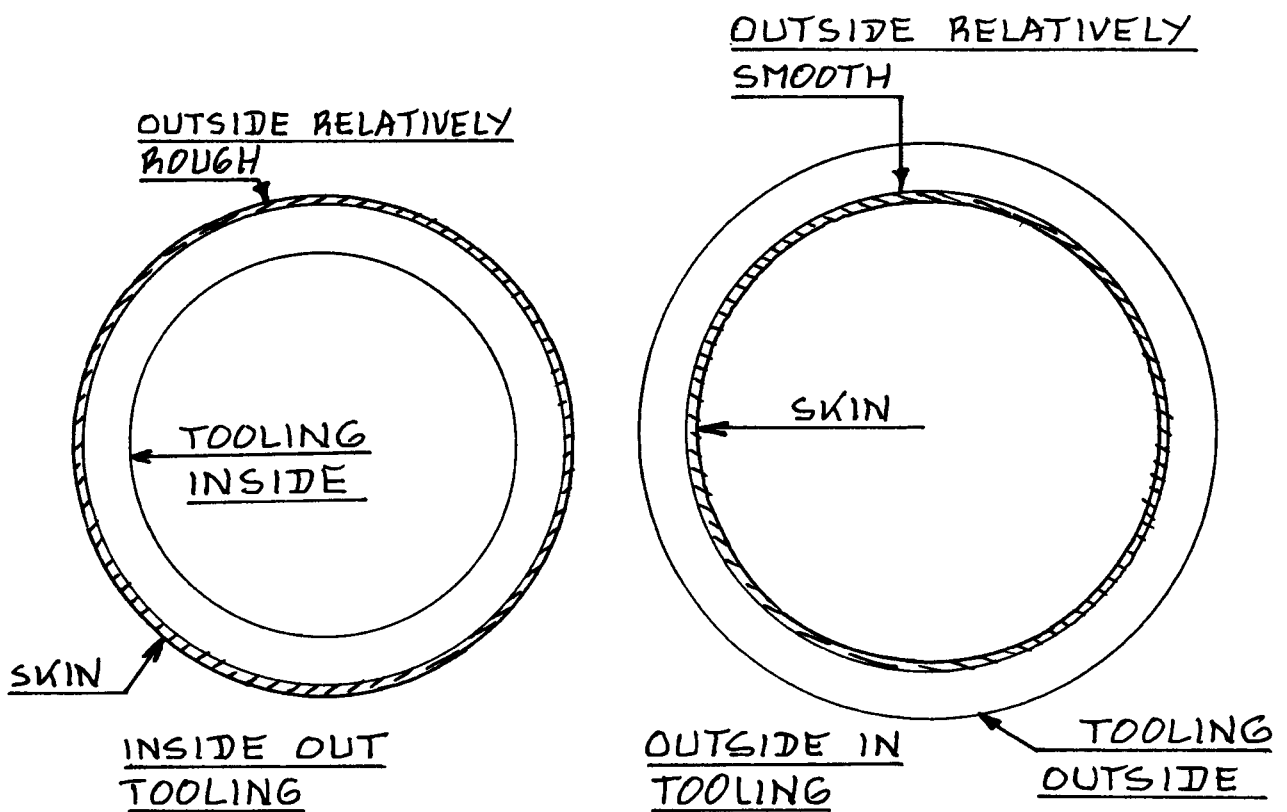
Inside-out (Old Style) and Outside-in Method (New Style) of Airframe Manufacturing
